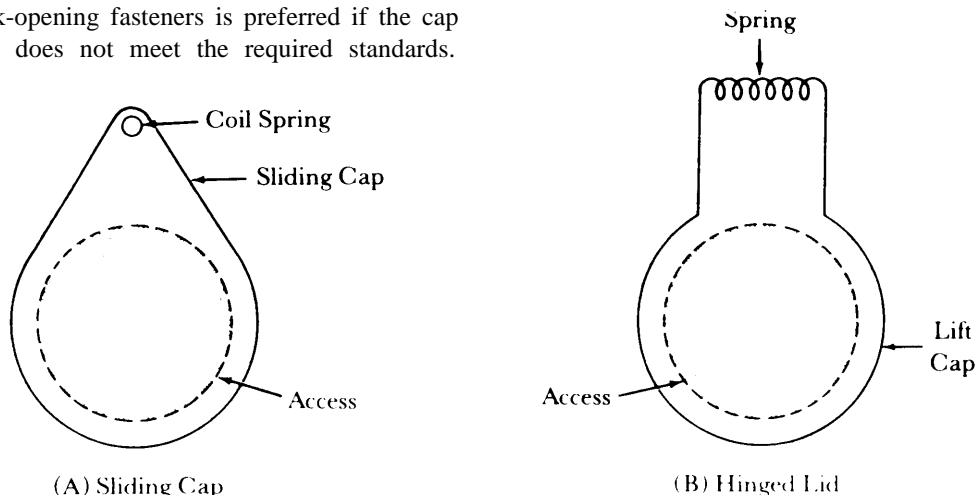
Examples of Spring Loaded Sliding and Hinged Access Doors
